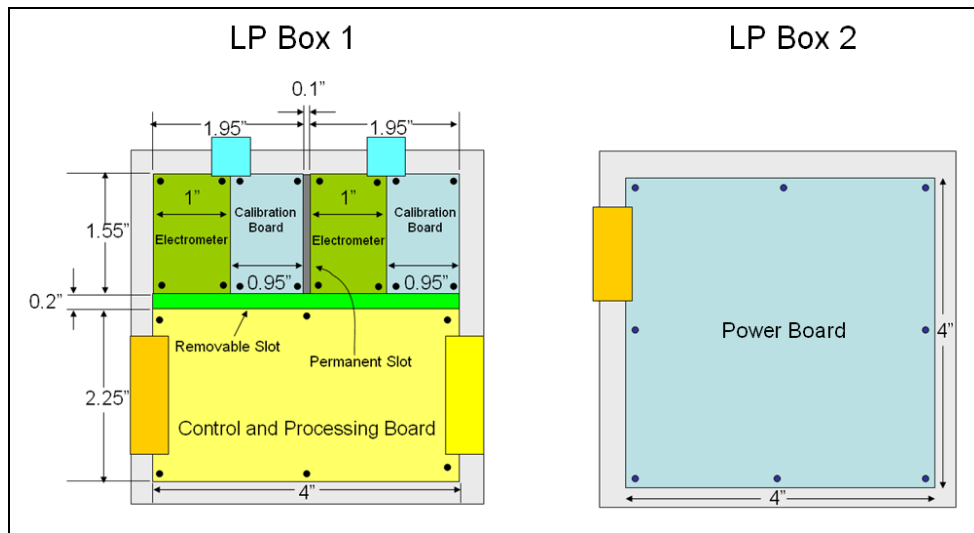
Internal board dimensions and layout for each of the boxes.
